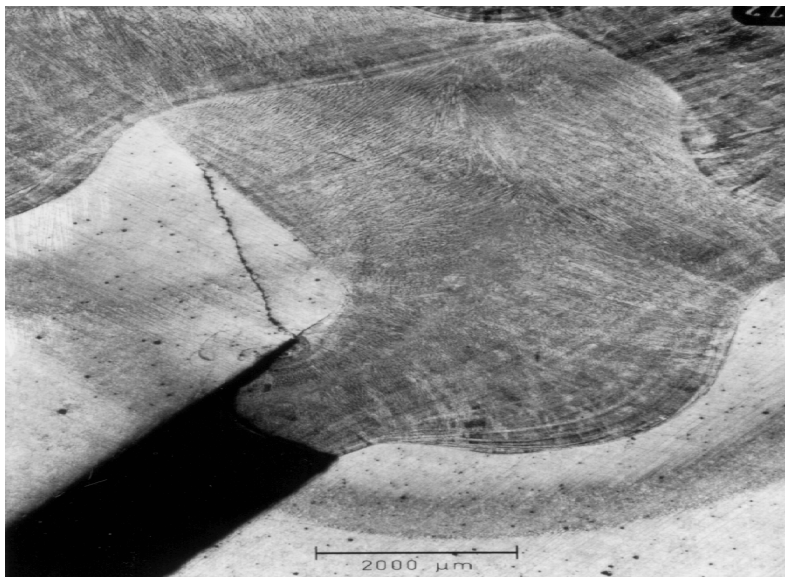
Example of HAZ zone cracking observed from a longitudinal notch in cruciform weld W342.
